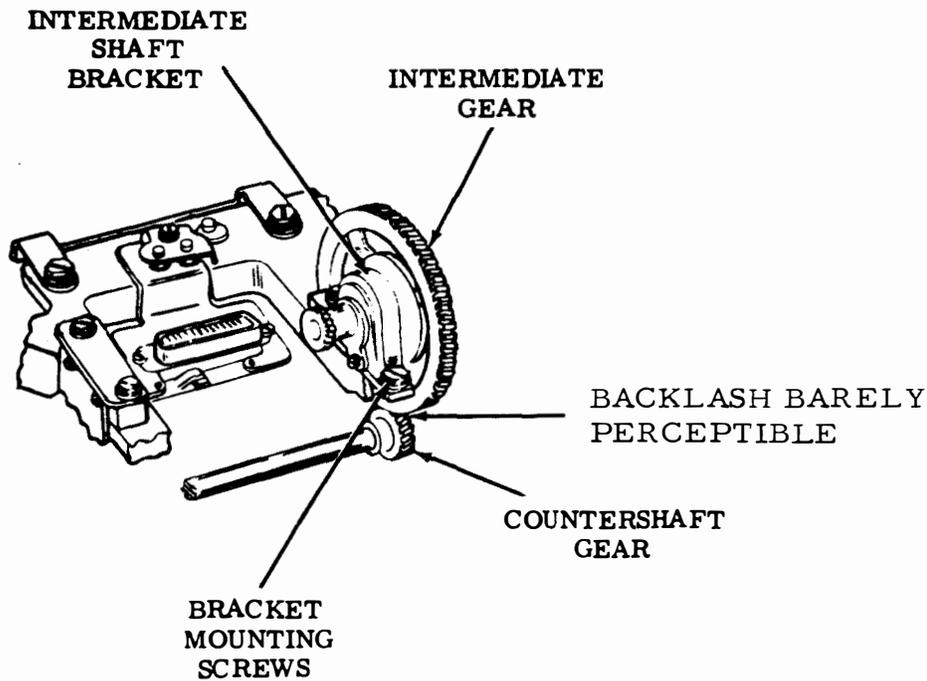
Intermediate Gear - Countershaft Gear Backlash
